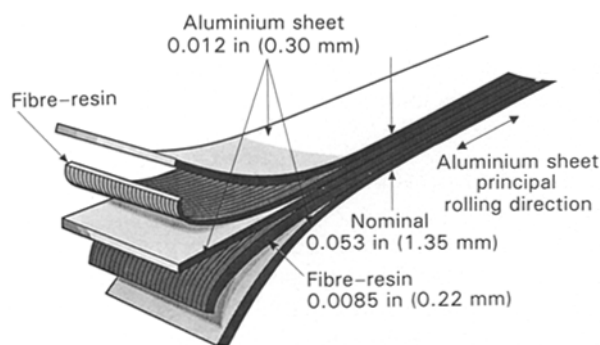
Fibre-metal structural laminates (typical 3/2 lay-up shown). Standard constituent materials: aluminium sheet alloy 2024 or 7475, aramid or glass fibre, unidirectional or cross-ply prepreg.
